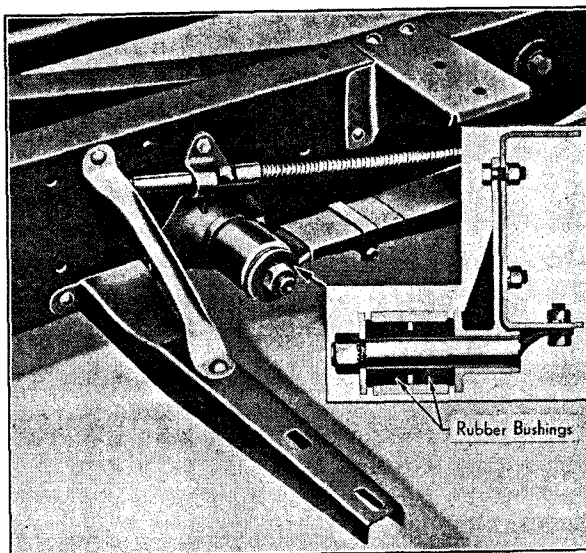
The front end of the rear springs on Cadillac cars is carried on rubber bushings
